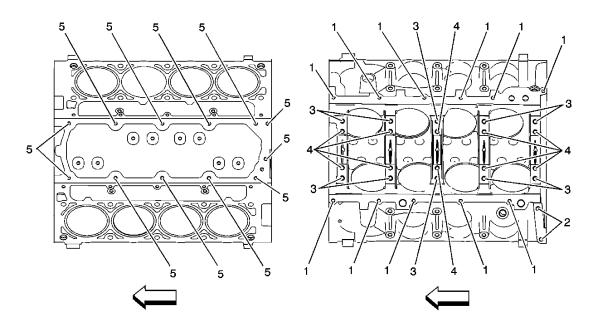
Engine Block - Top/Bottom Views Courtesy of GENERAL MOTORS CORP.
